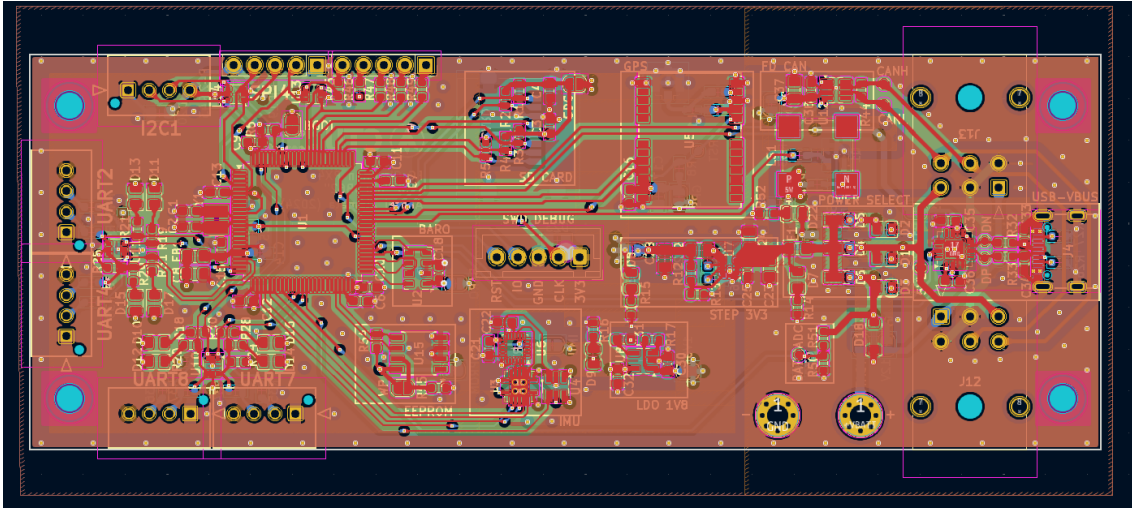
PCB Routing inside the KiCad PCB Editor.
